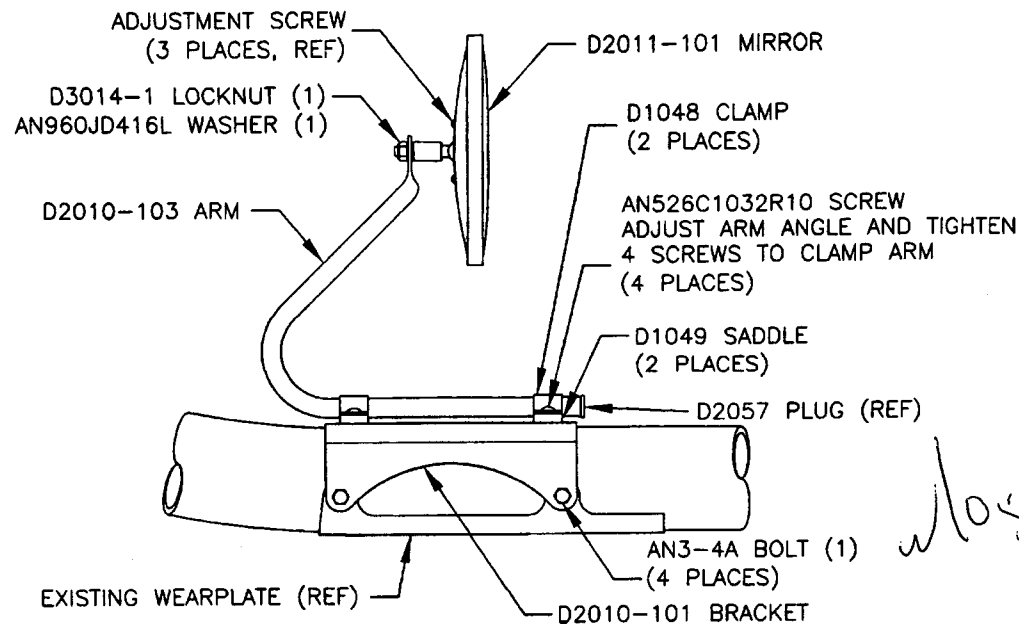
Installation of D500-560-041 Cargo Mirror Assembly
